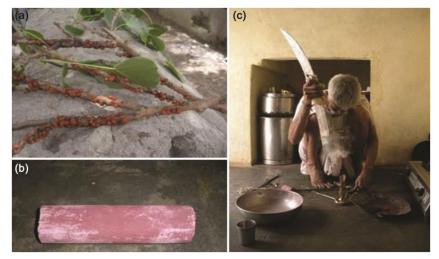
(a) Twigs fully encrusted with lac, (b) chapadi and (c) attaching a sword blade to the hilt with softened chapadi.
